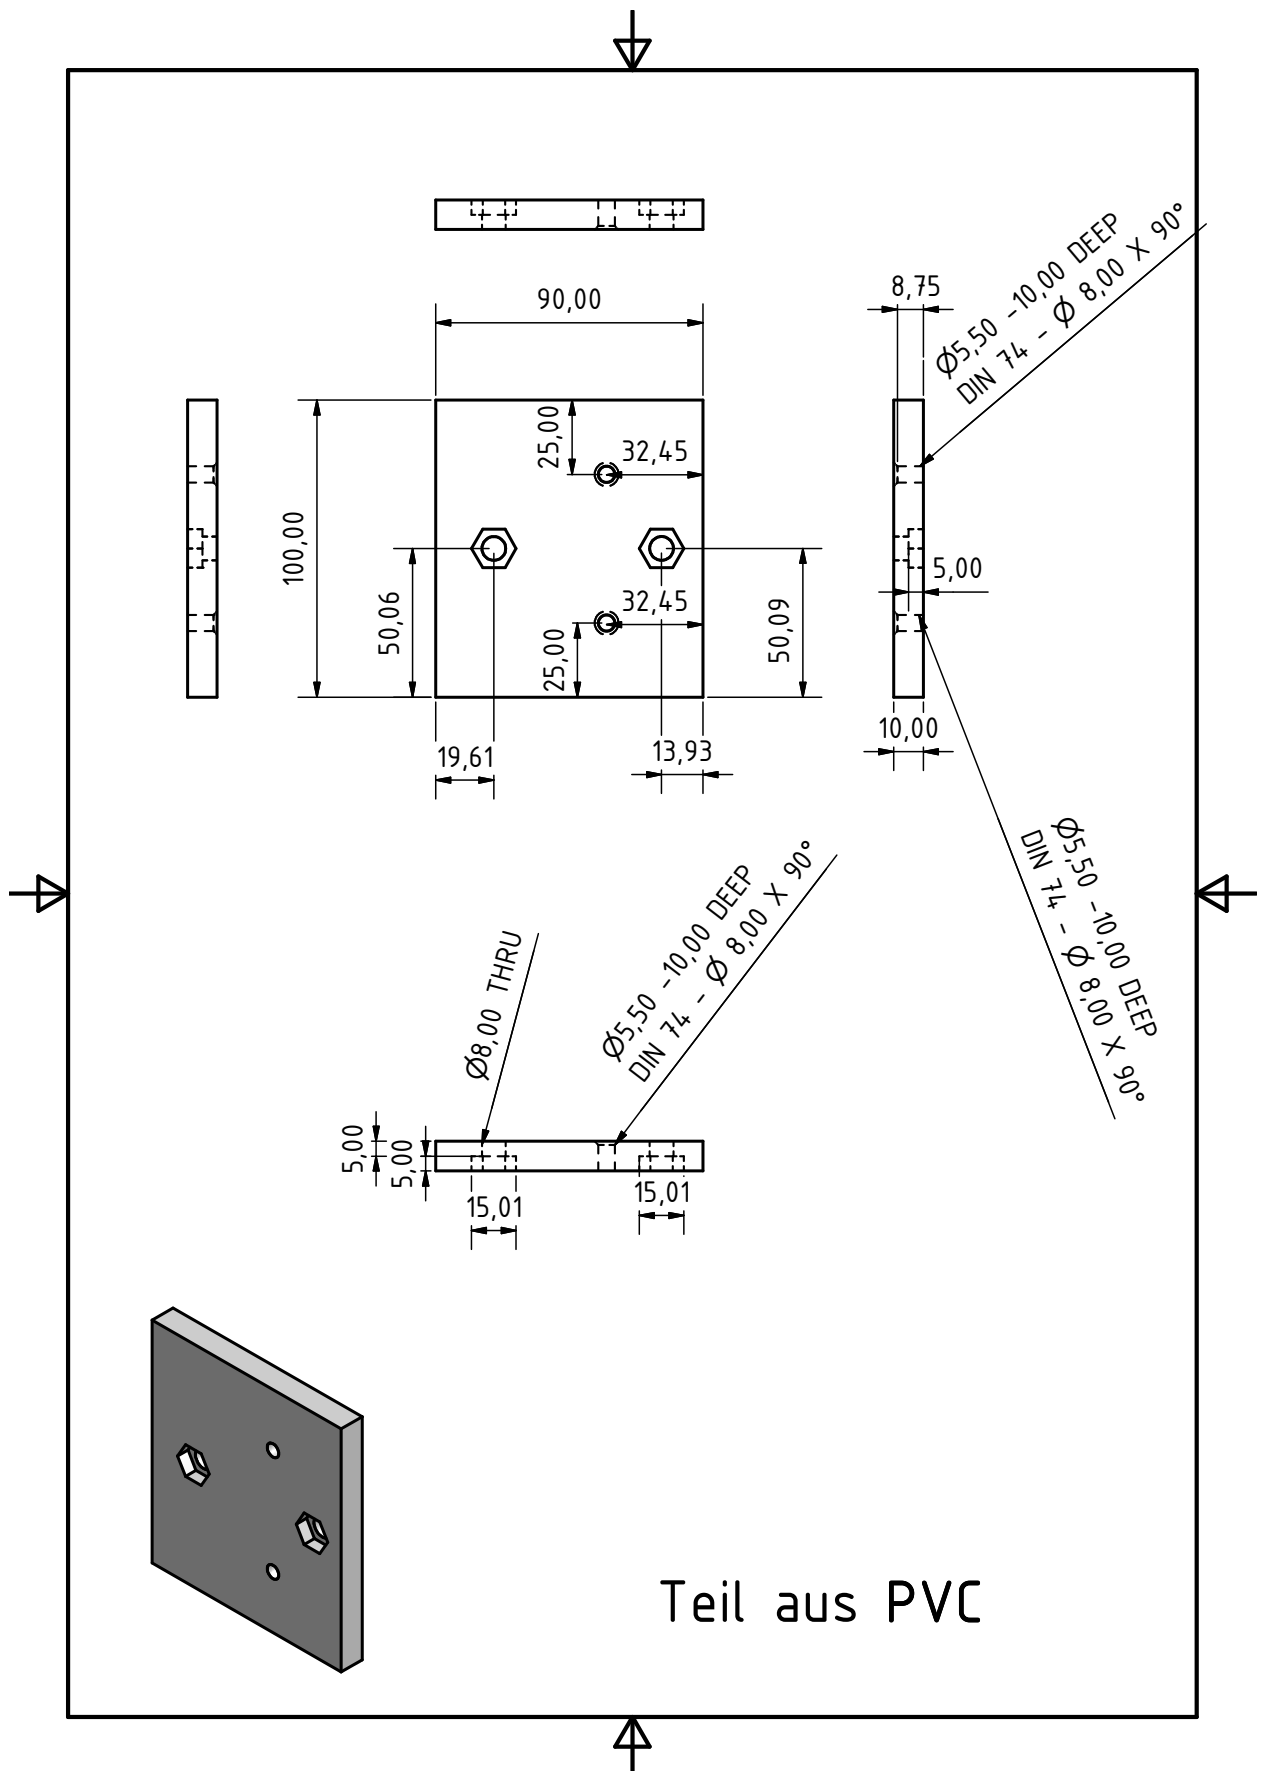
CAD sketch of detector basis part that carries the optics part on the adjustment elements.
